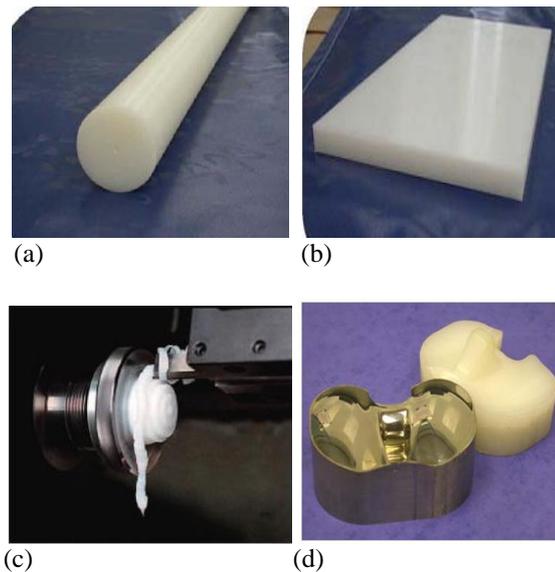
Sample parts produced by (a) ram extrusion, (b) compression mould, (c) machining and (d) direct compression mould
